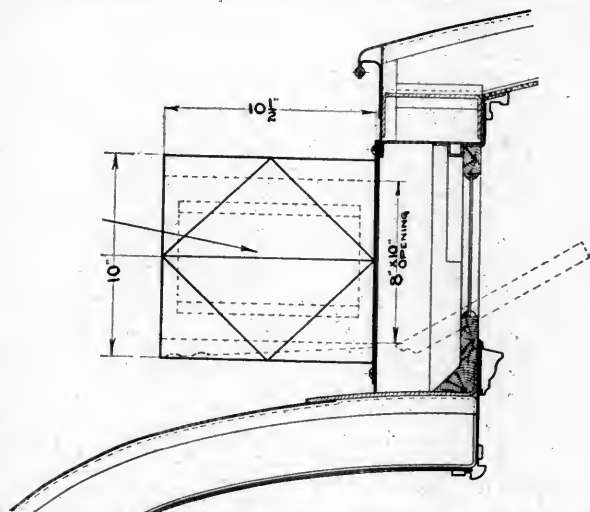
Application of Ventilator to Monitor or Clerestory Roof
